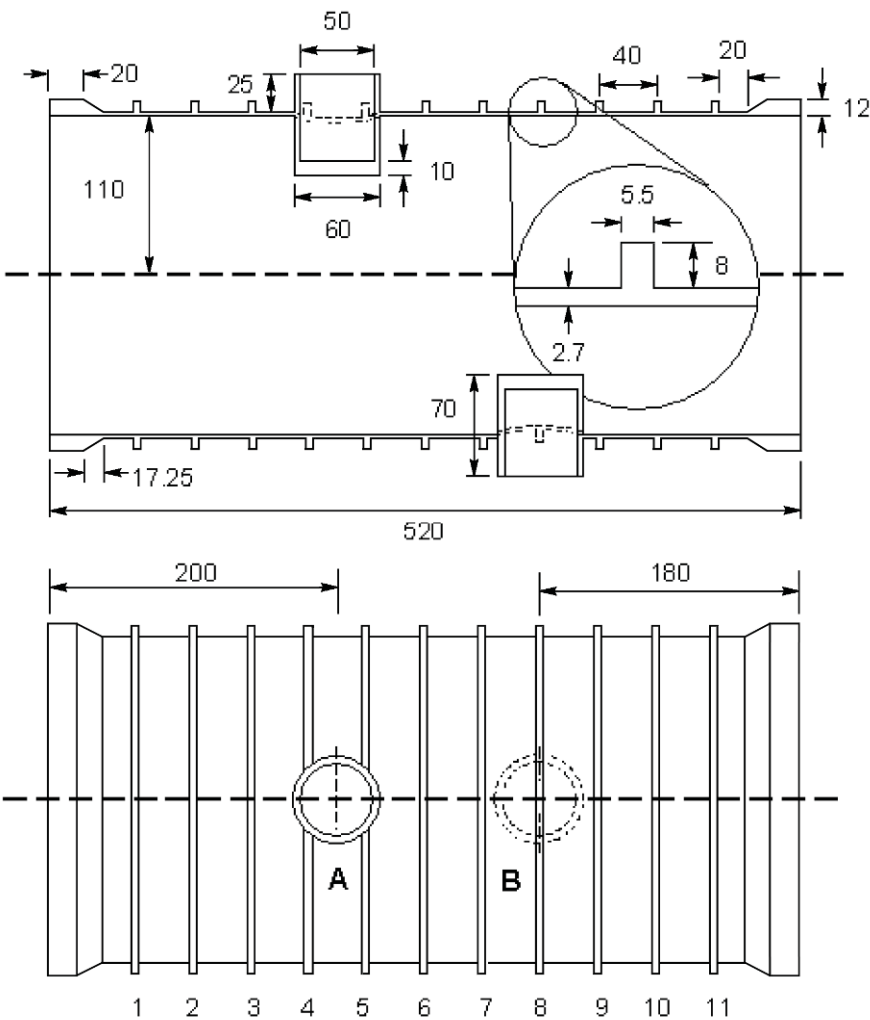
Nominal Geometry of Cylinder with Penetrations (mm).
